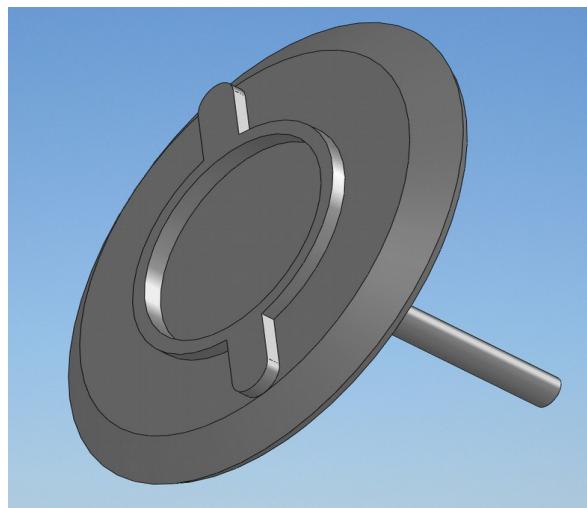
CAD representation of the 35mm diameter silicone flat valve.
